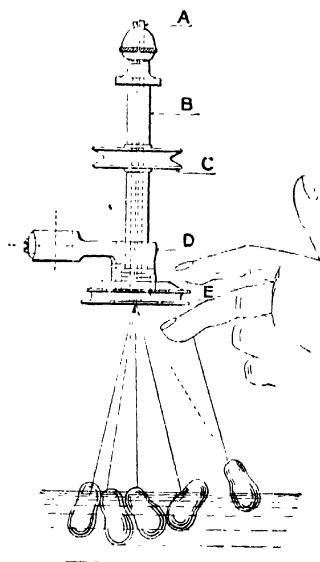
The Jette-bout, combining Five Cocoons in One Thread.
